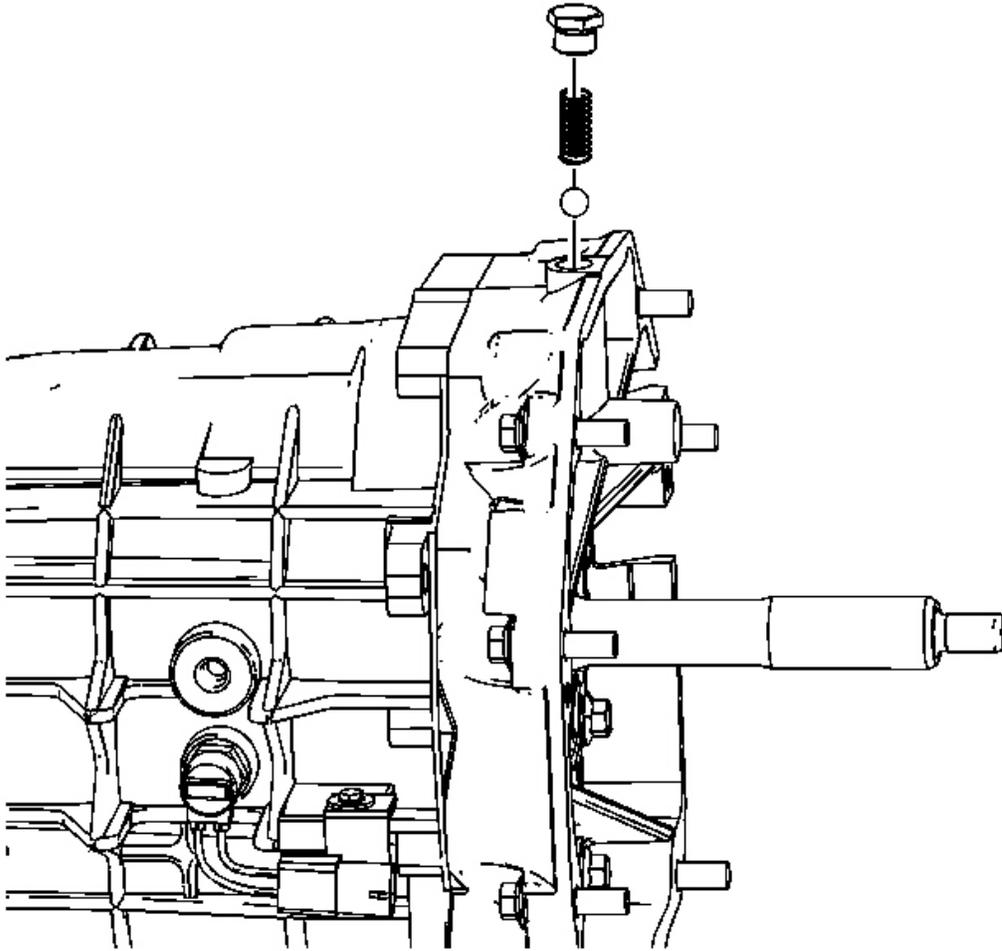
Installing/Removing Shift Detent Plug, Spring And Ball
